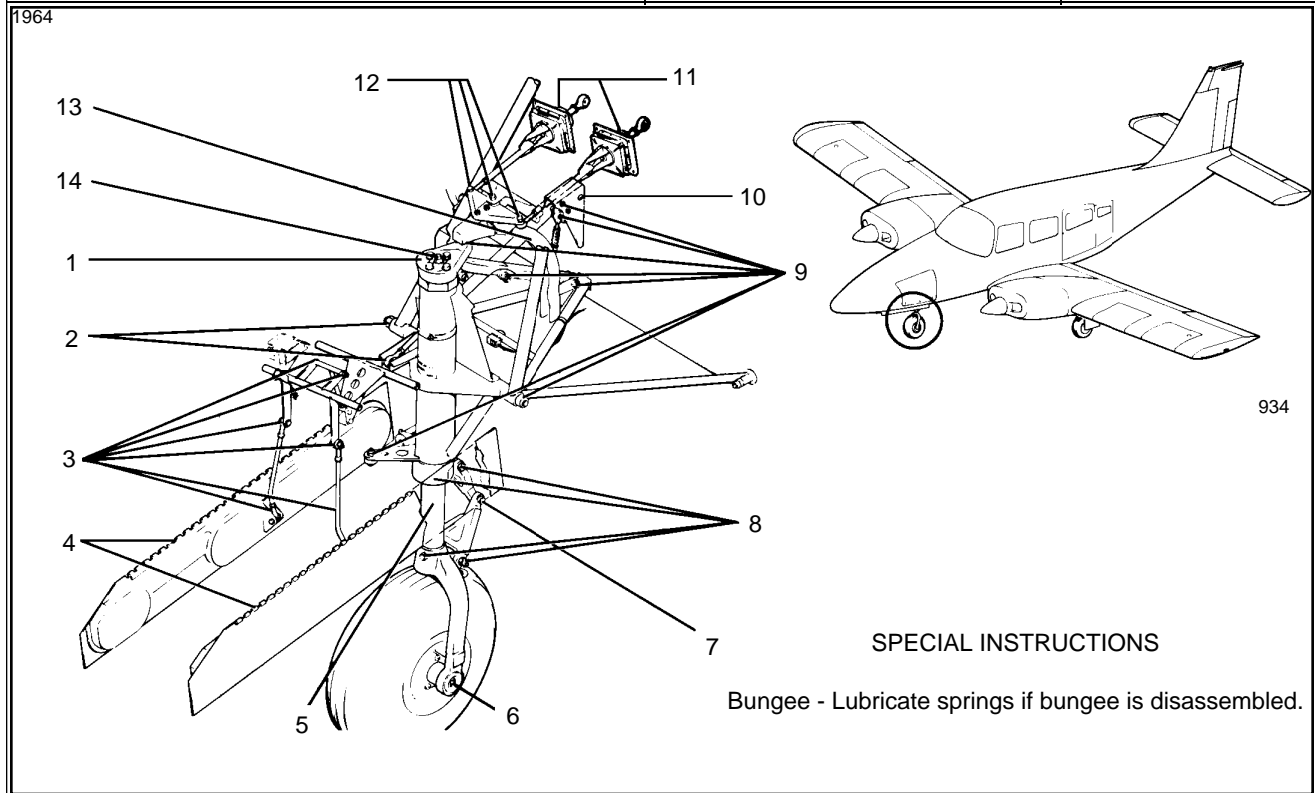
Lubrication Chart (Nose Landing Gear)
